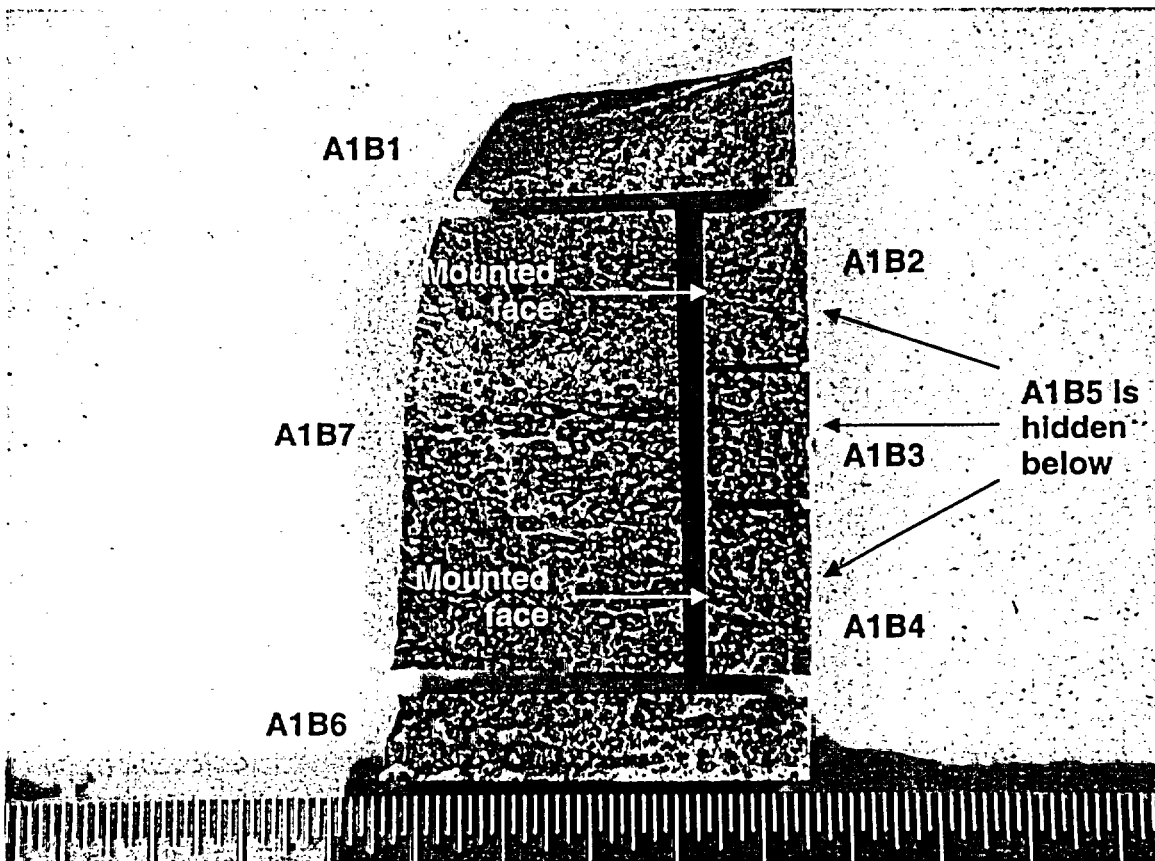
Section photo for Piece A1B, looking at the cavity side wall. The mounted surfaces of Piece A1B2 and Piece A1B4 is indicated.
